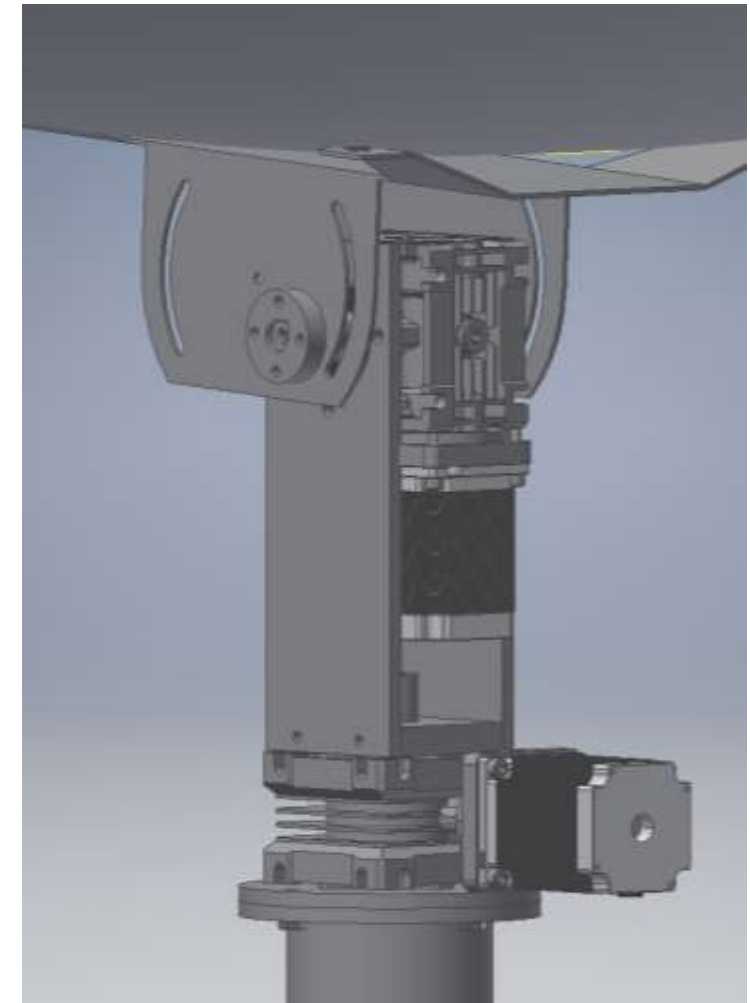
Steerable Pier Final Design: Stepper motor and reducer gearbox for Azimuth & Elevation motion (Hincapié Tarquino et. al. in. prep.)
